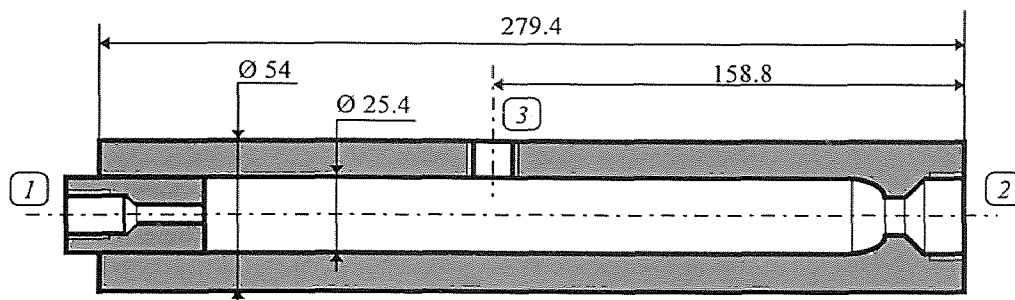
Cross Section of Inflator Vessel A [dimensions in mm]
